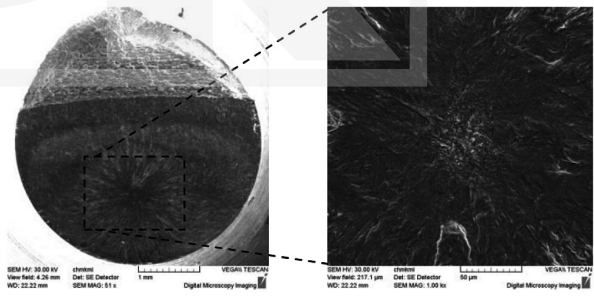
A fracture of the Hardox 450 steel specimen on a macro scale; sub-surface fatigue crack initiation with a distinct crack initiation with a "fish-eye"
